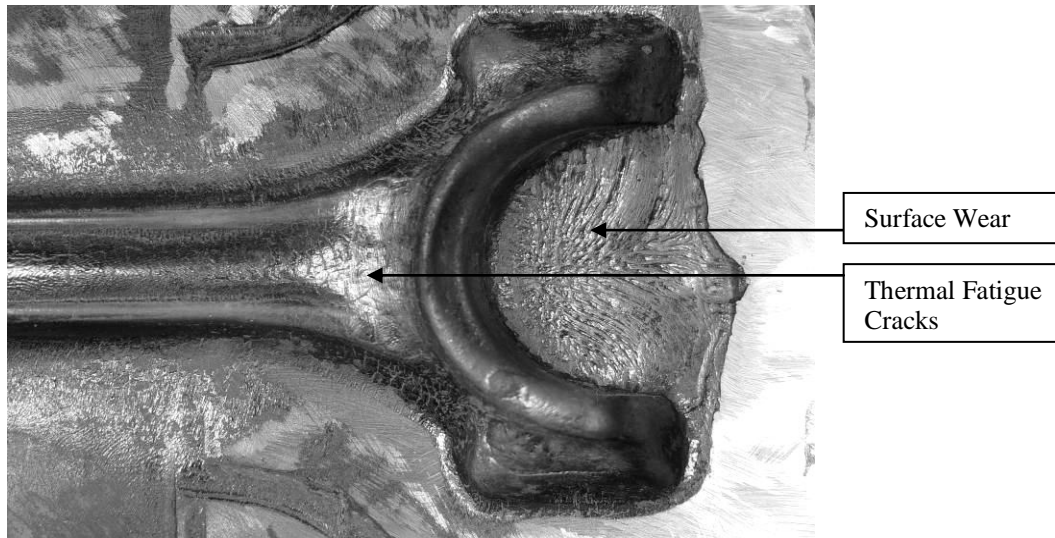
A photograph of flood-welded die impression after 20,000 pieces showing surface wear and thermal fatigue cracking
